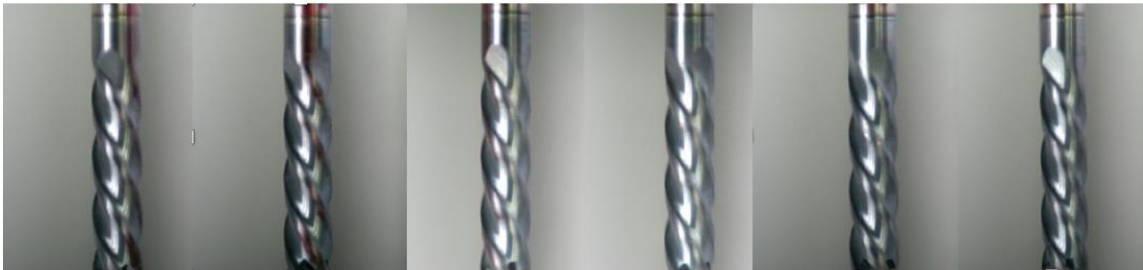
End mill tool phase-shifting raw image from location 1~6.
